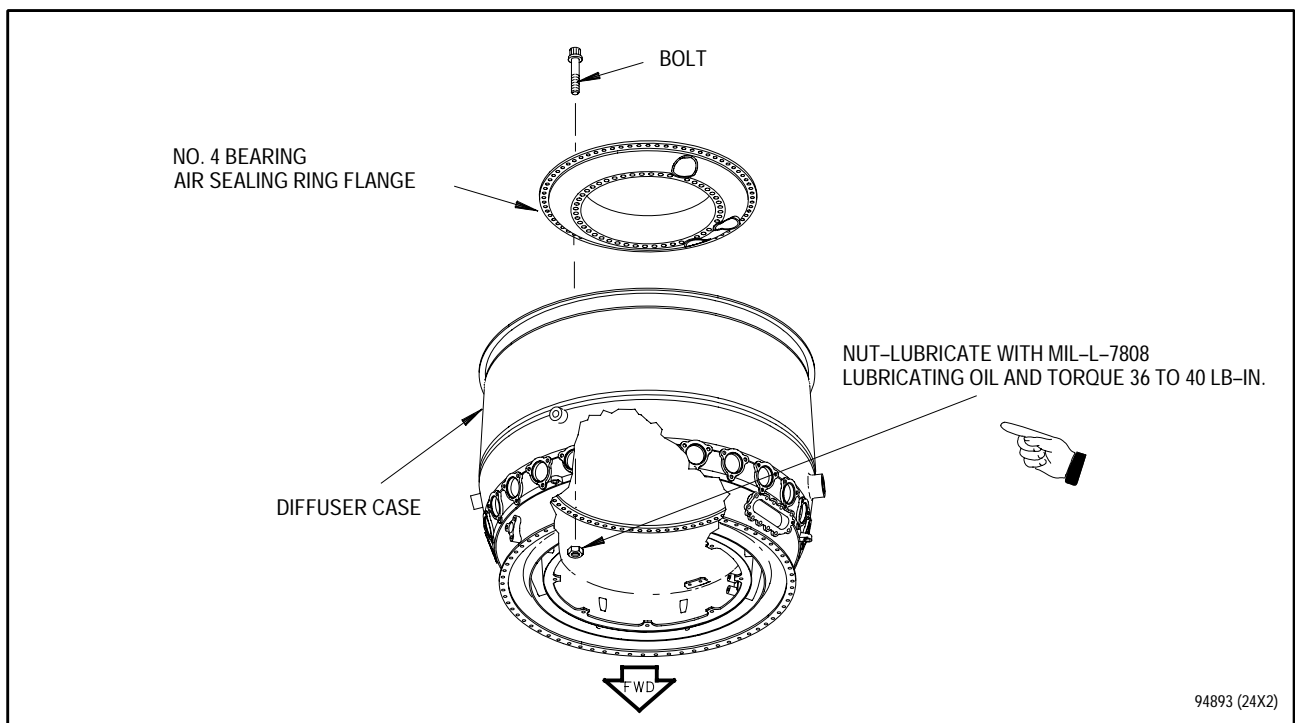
No. 4 Bearing Air Sealing Ring Flange - Installation
